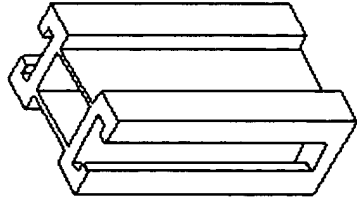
D: Two connectors used to connect two floor frame panels as well as two ceiling frame panels (20 foot high cube collapsible cargo container)
